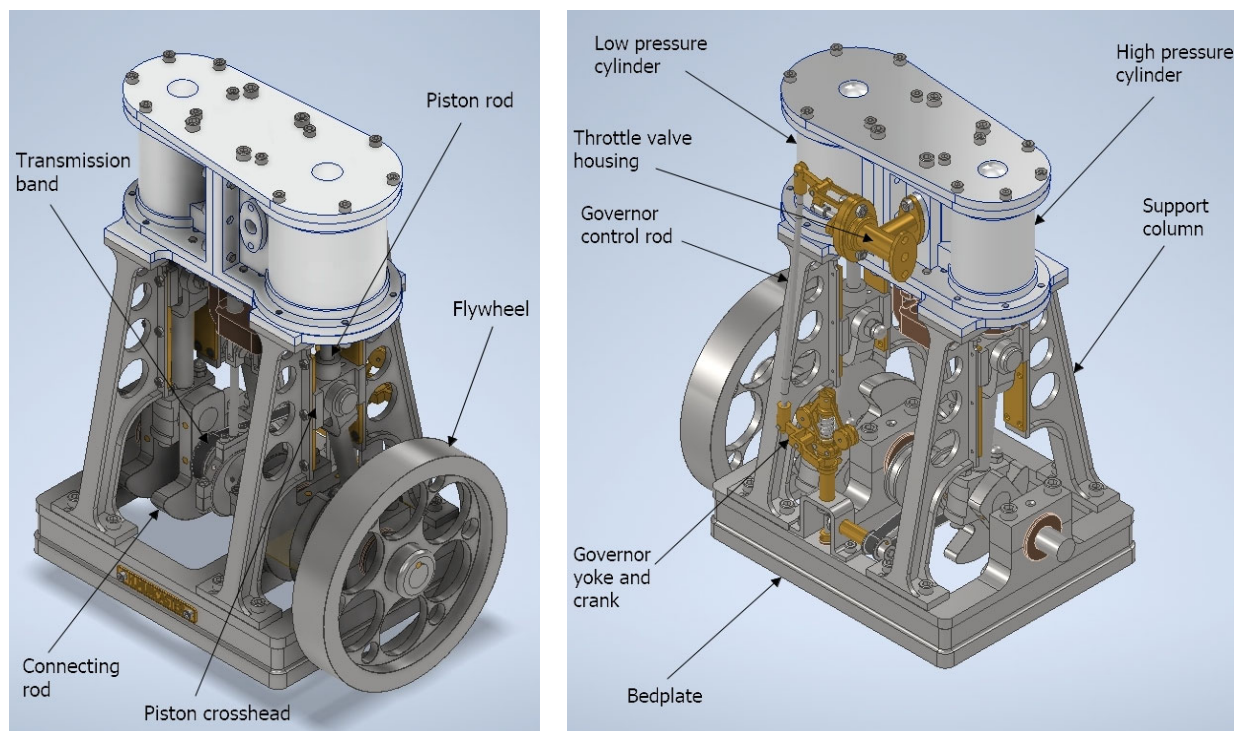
Isometric views of the machine: front view (left) and rear view (right).
